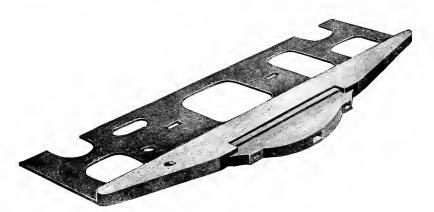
Commonwealth Steel Company's One Piece Cast Steel Buffer Sill and Anti-Telescoping Plate for Non-Vestibuled Cars.
